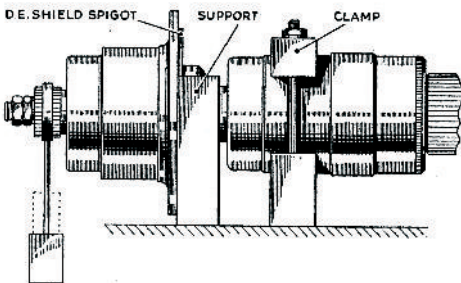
Testing Leyland C.A.V. Starter. The Torque Lever and Clutch Clamp are shown in this illustration.
